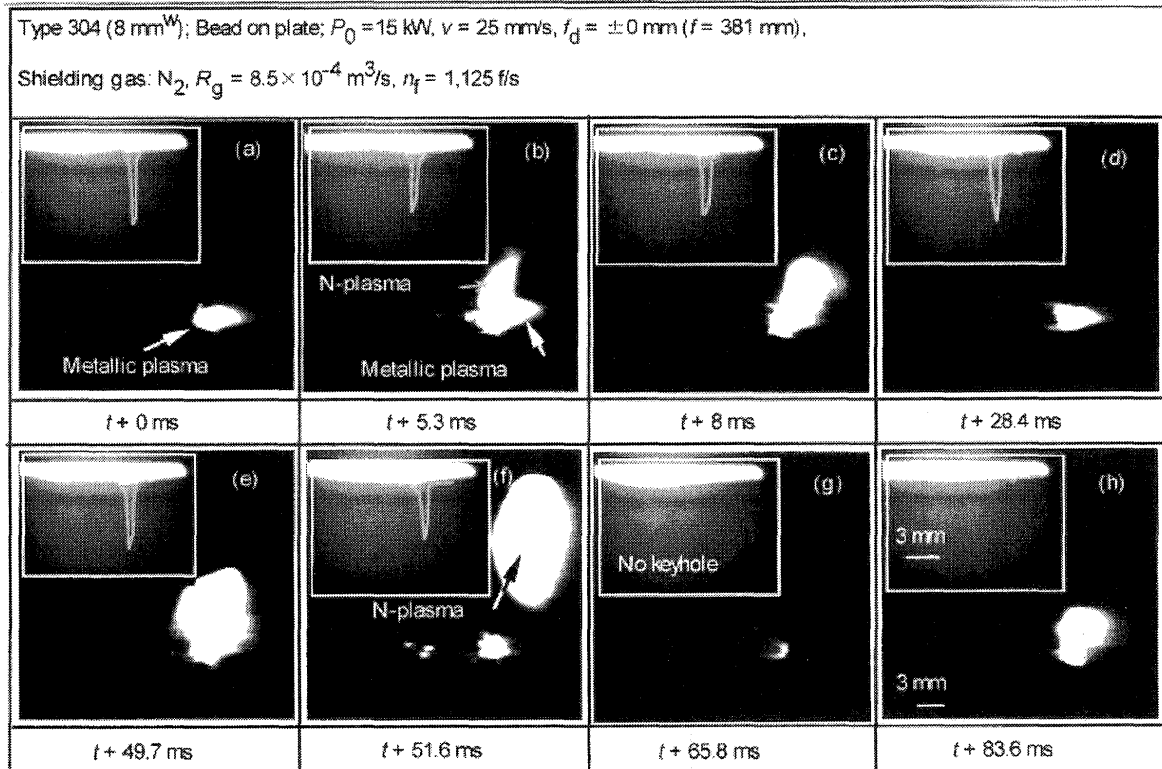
Dynamic behaviour of laser induced plasma and keyhole during CW CO<sub>2</sub> laser welding of stainless Steel in Nitrogen shielding (Welding conditions are the same with Fig. 21)
